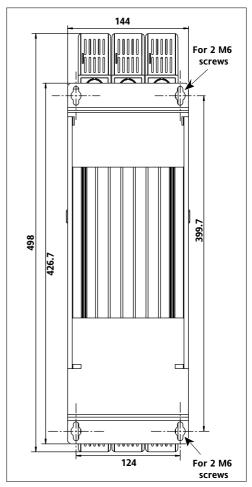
Bulkhead mounting - ≥ 125 A units
